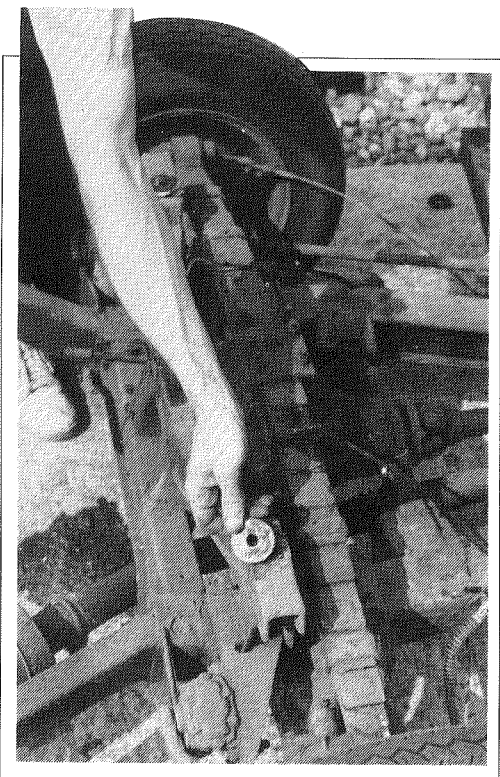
Don't forget to pick up the ancillary fittings. Two thick alloy washers on the spring tunnel chassis member...
